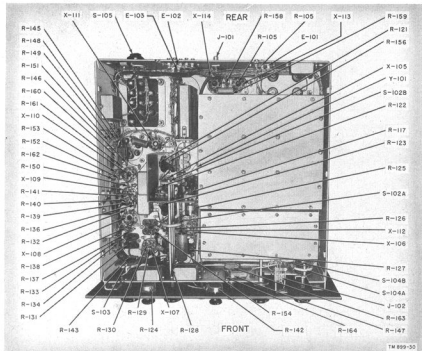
Radio Receiver R-320/FRC, bottom view of chassis, showing additional components.
